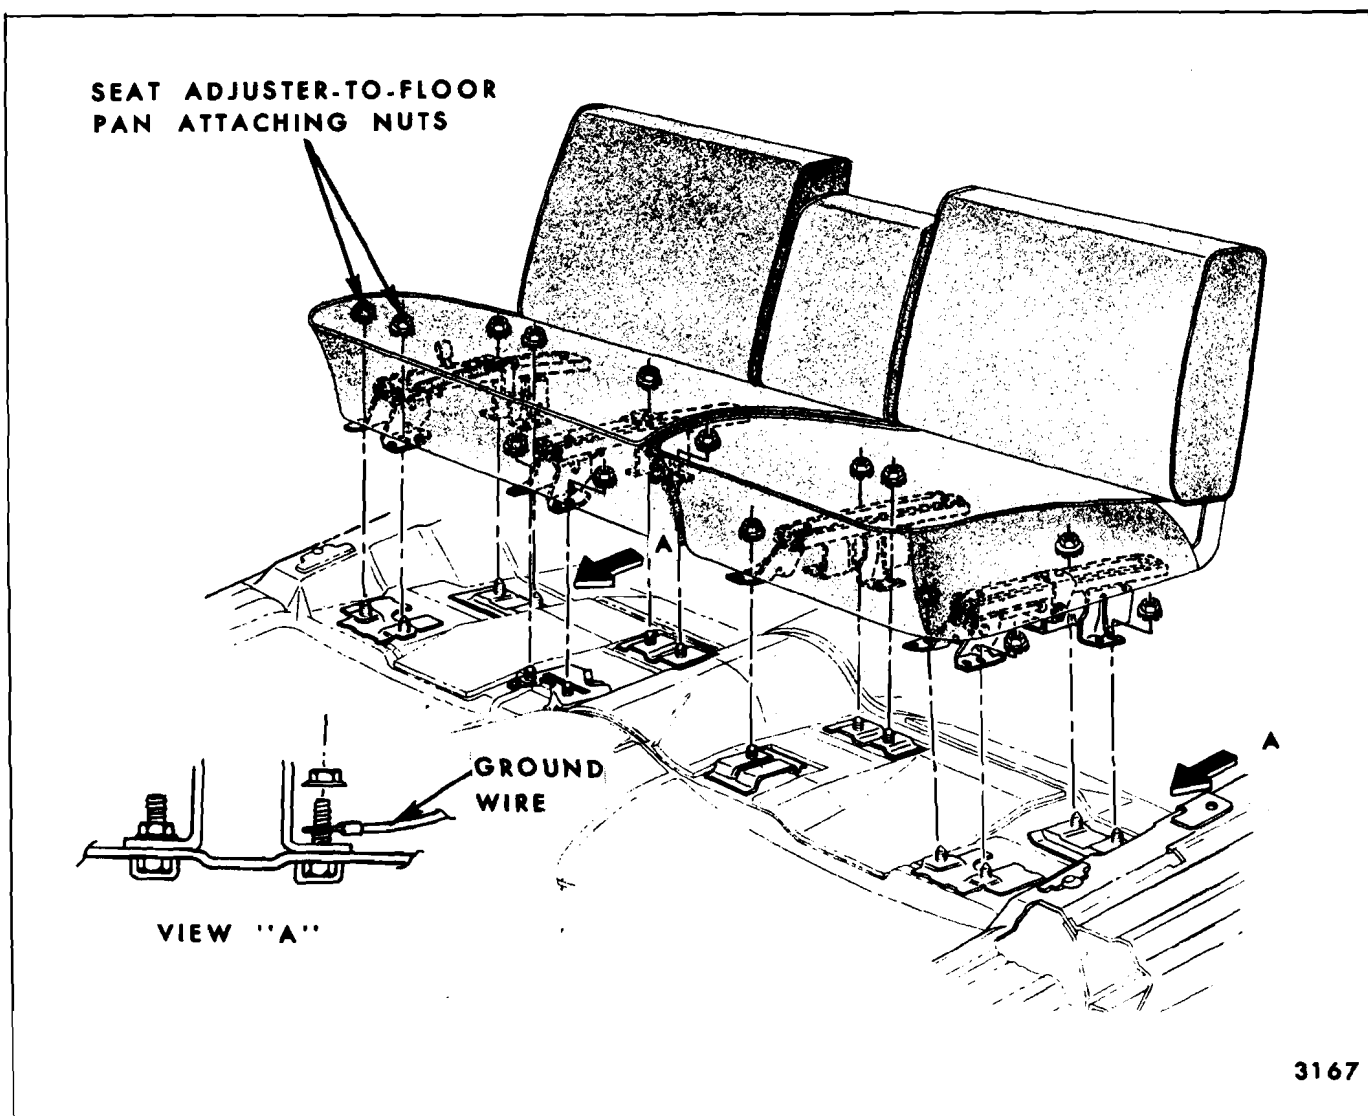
60-40 Seat Adjuster Floor Pan Attachment - Cadillac, Buick and Oldsmobile
